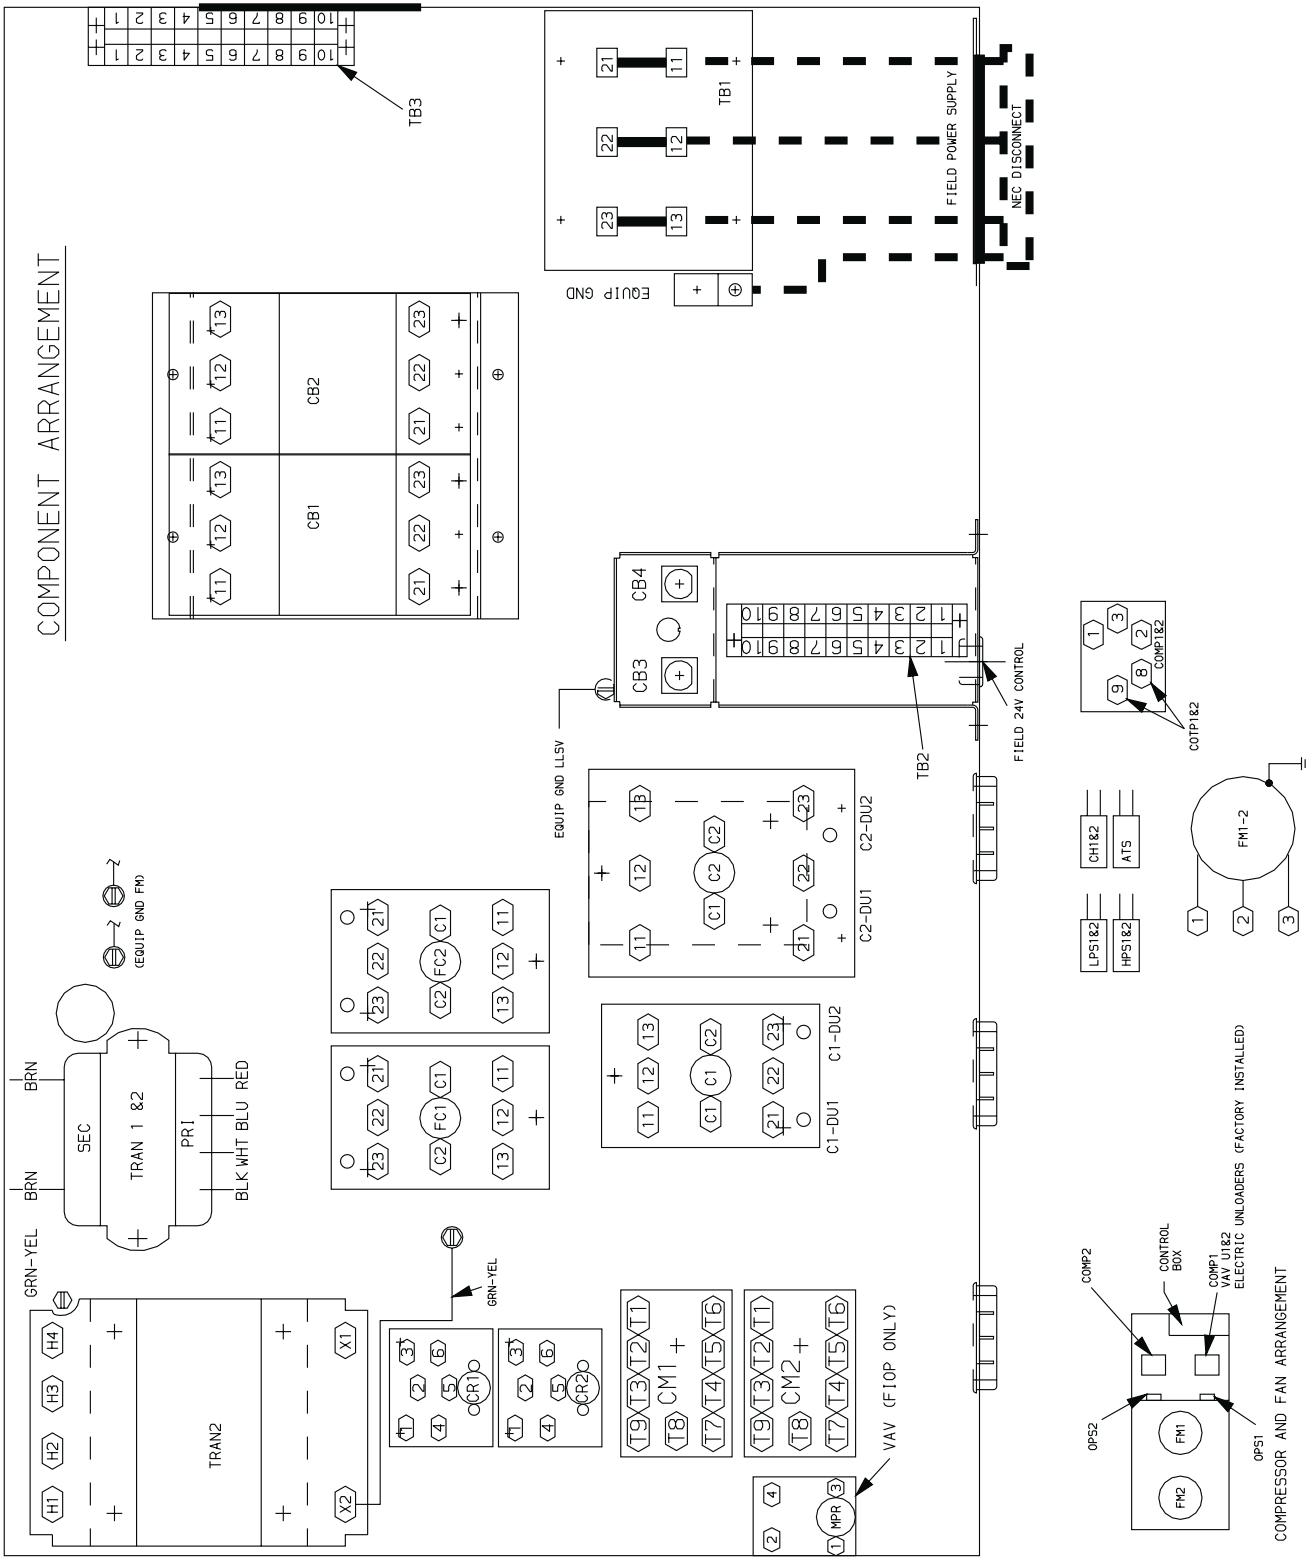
Component Arrangement, 38AH024-034, 575-3-60 Units
